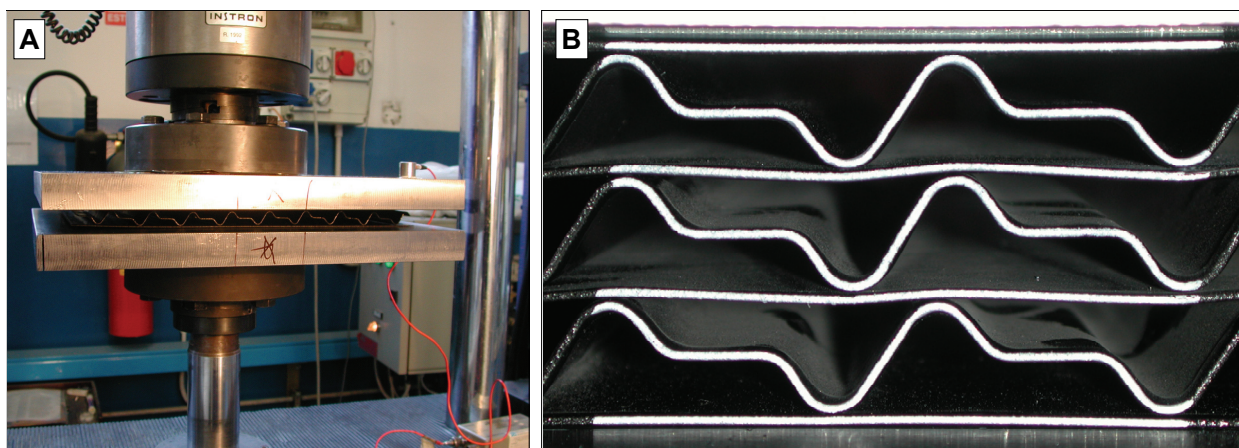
(A) photo relative to Test tool and (B) photo of the package of sheets after the compression test (enameled sheets through SM013).
